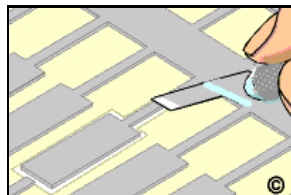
Cut out the new surface mount pad. Cut from the plated side.
